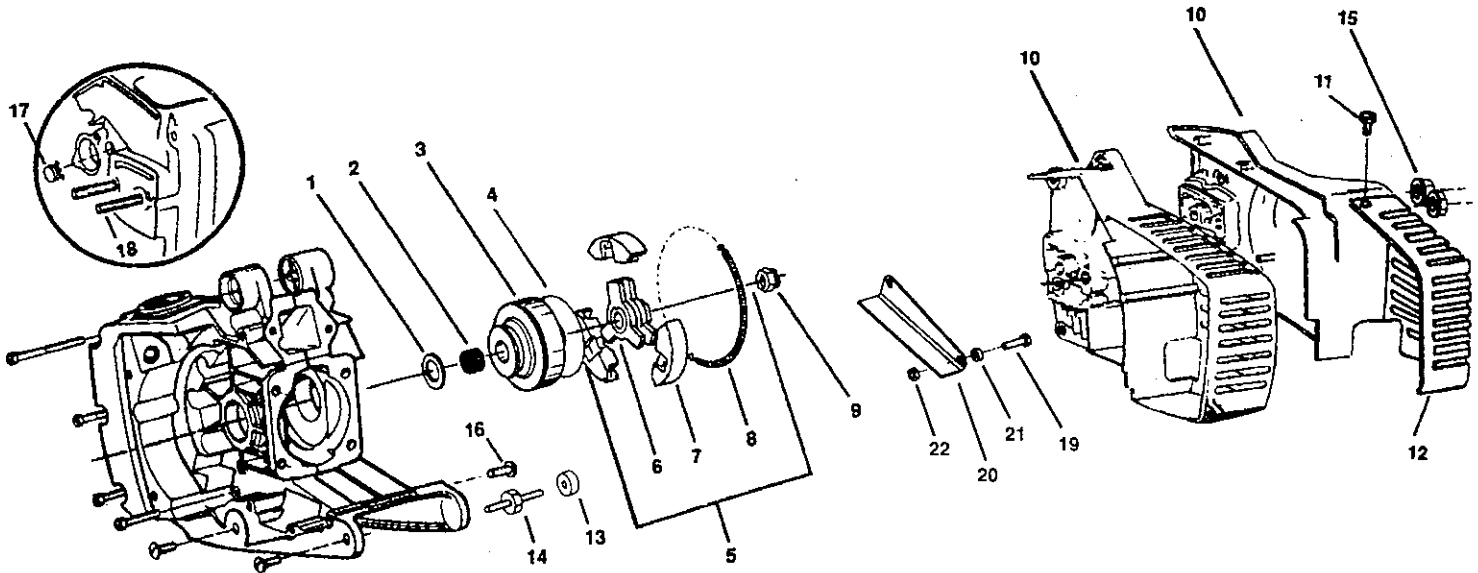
FIGURE VI - PARTS LIST CLUTCH AND CLUTCH DRIVE
